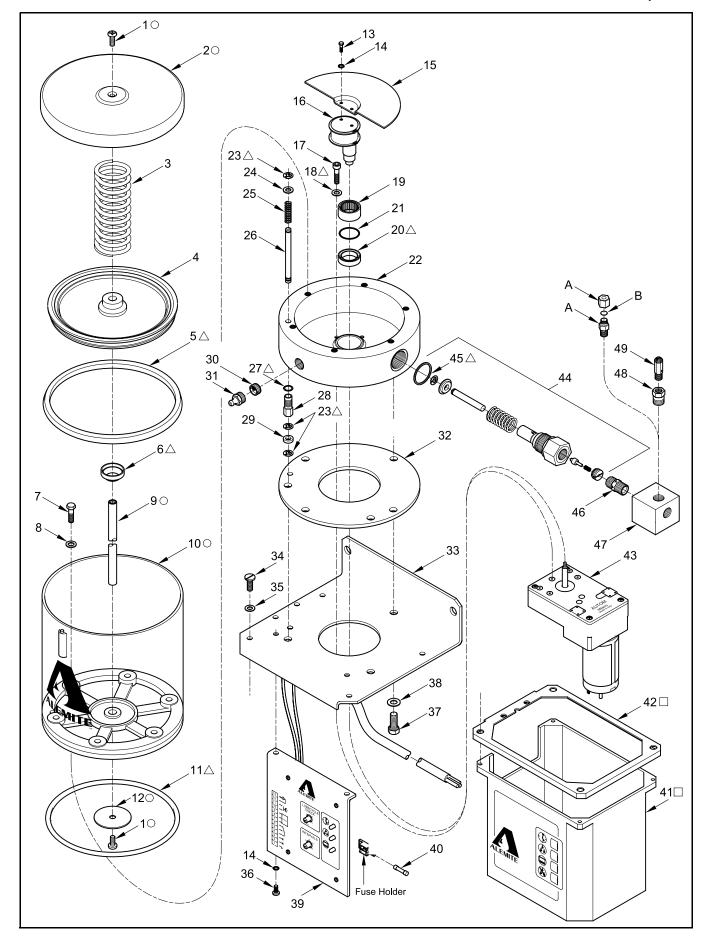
Lubricator Model 4221 Series, 4251 Series, and 4261 Series - Exploded View
